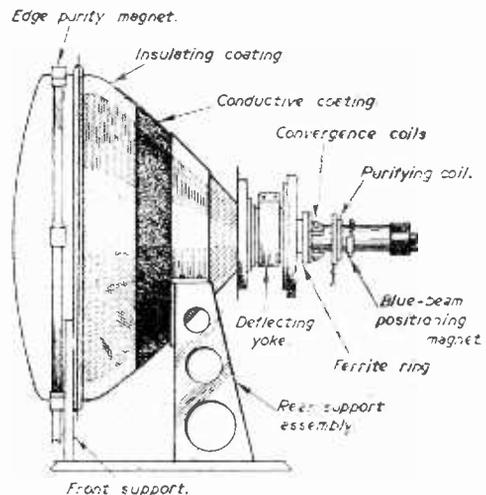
Sketch showing a modern colour tube with all the essential parts identified.
